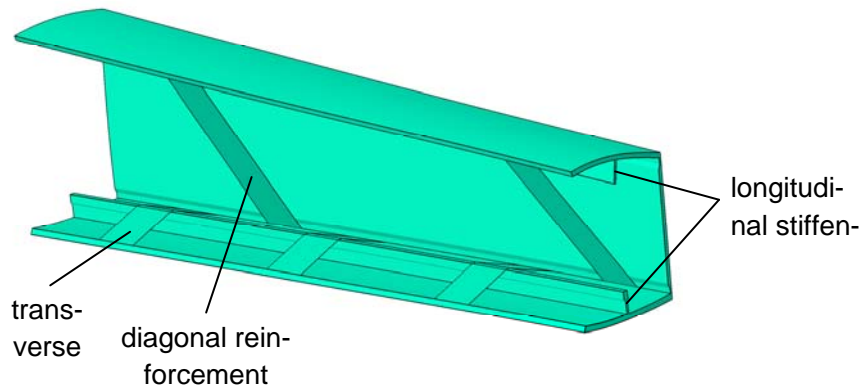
Schematic representation of a section of the box girder. The leading shear web has been removed; the thickness of the diagonals and transverse stiffeners is not shown.
